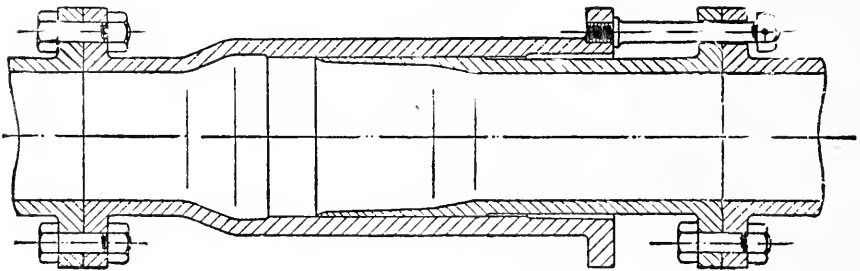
Steam and Feed Pipe Expansion Joint.
